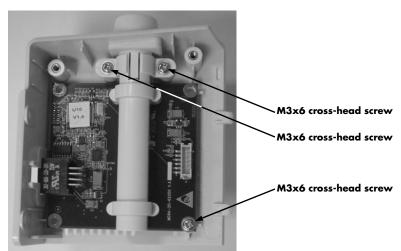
Remove three (3) M3x6 cross-head screws.
